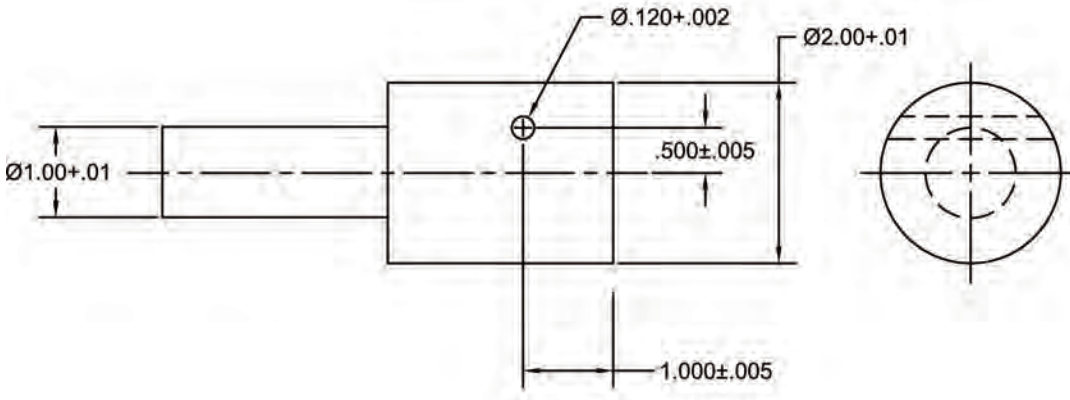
“OLD” Drawing without GD&T.
